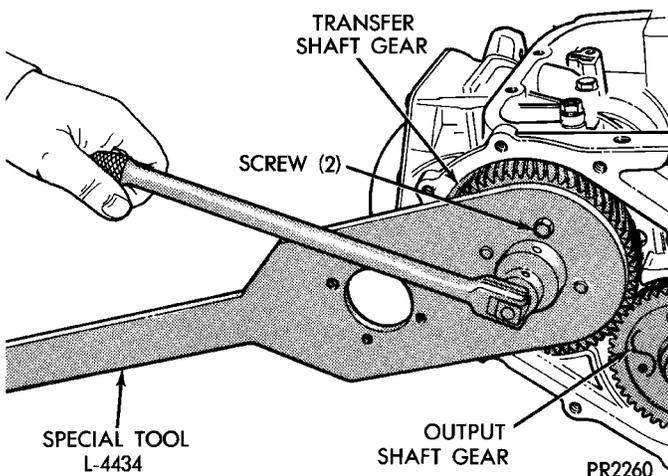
Transfer Shaft Gear Nut and Washer
